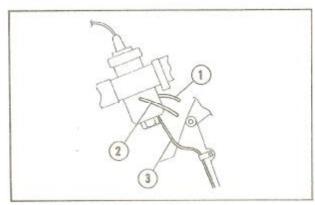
(1) Right carburetor breather tube (2) Left carburetor breather tube
